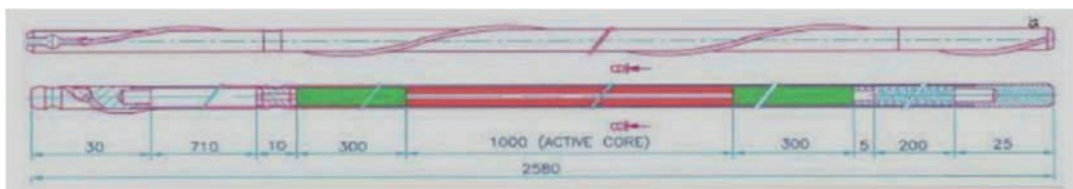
PFBR fuel pin configuration (Left to Right indicate bottom to top position in in-situ).
